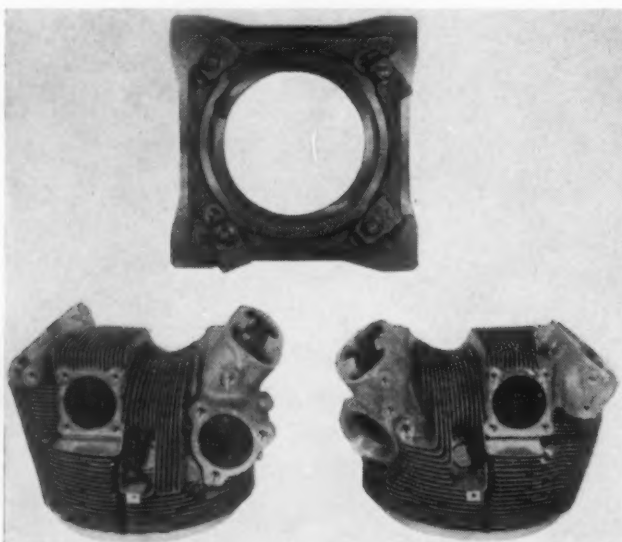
FRONT AND REAR CYCLONE CYLINDER HEADS AND SPECIAL MOUNTING PLATE (ABOVE) ON WHICH THESE ARE CARRIED THROUGH THE GREENLEE MACHINE
